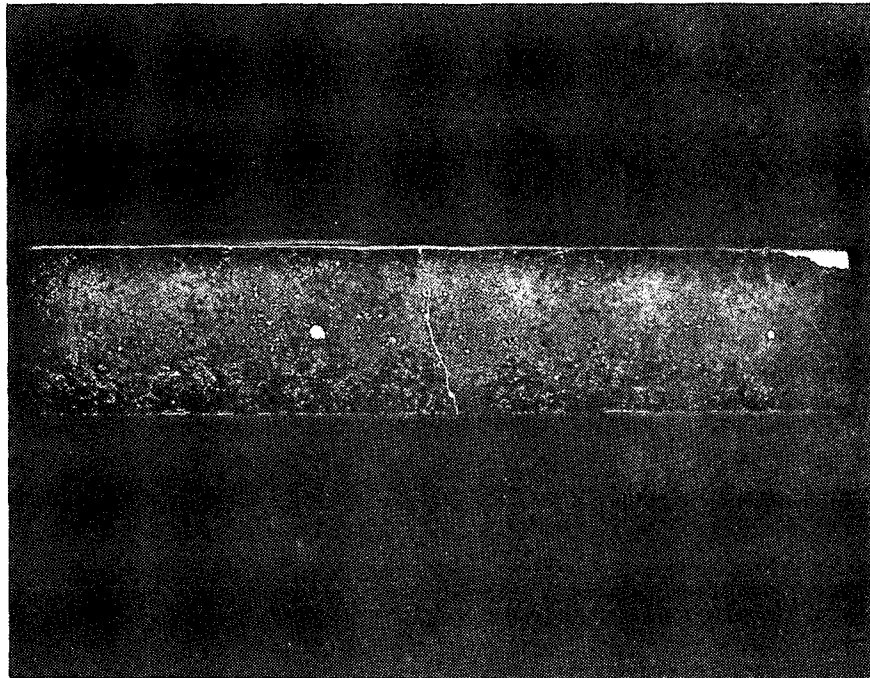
Backlighted 1/4-In.-Thick Coated RSI
